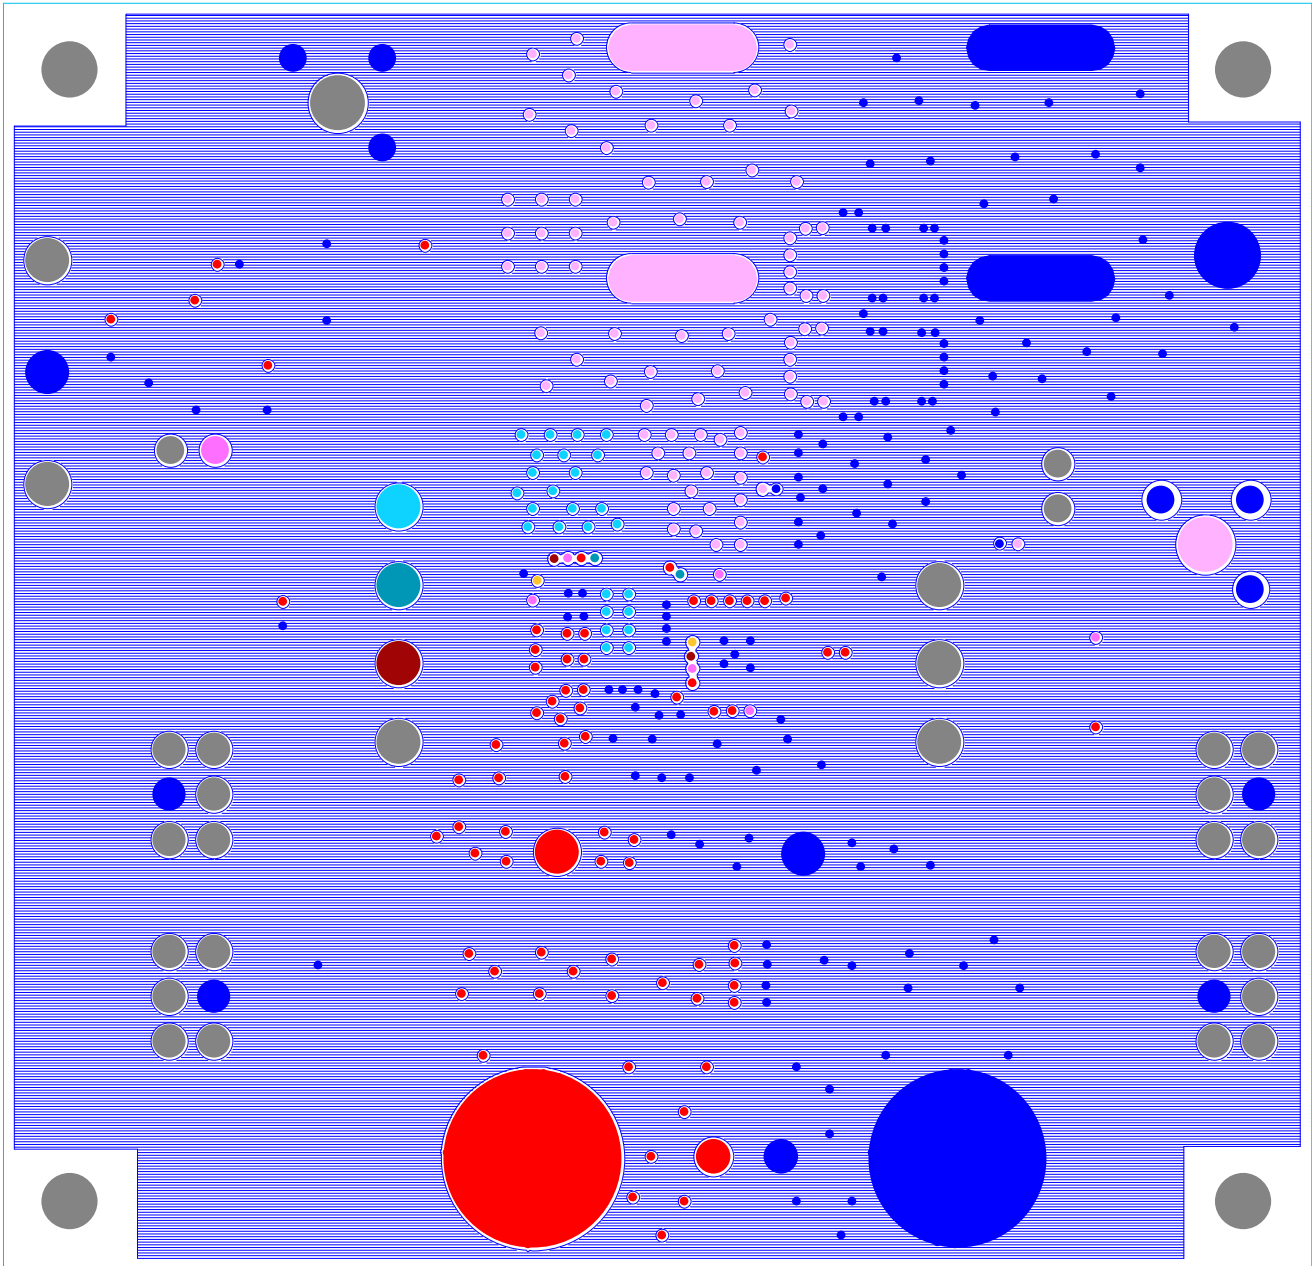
PCB - INNER LAYER 2 (TOP VIEW)
